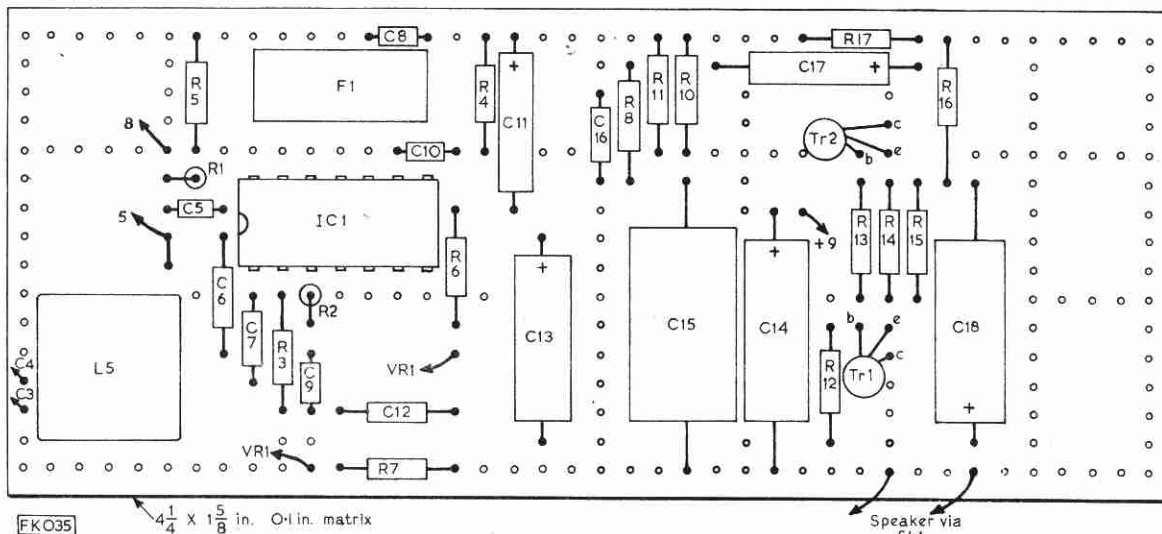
Component layout on the perforated board. Use insulated wire for the underside wiring.
